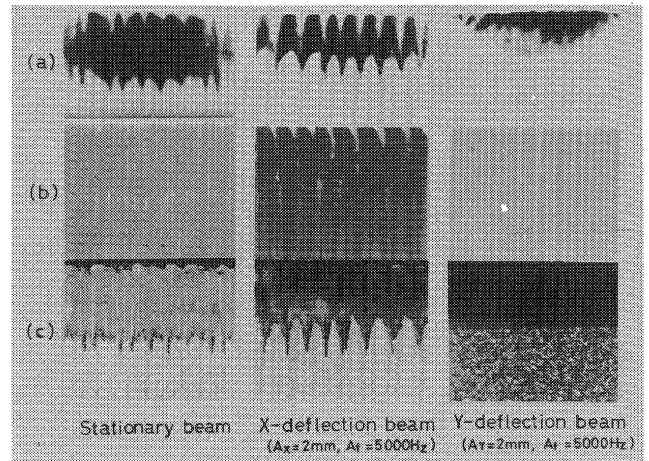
X-ray film photographed from side and back side of weld bead by pin-hole camera and radiography (5083 alloy).
